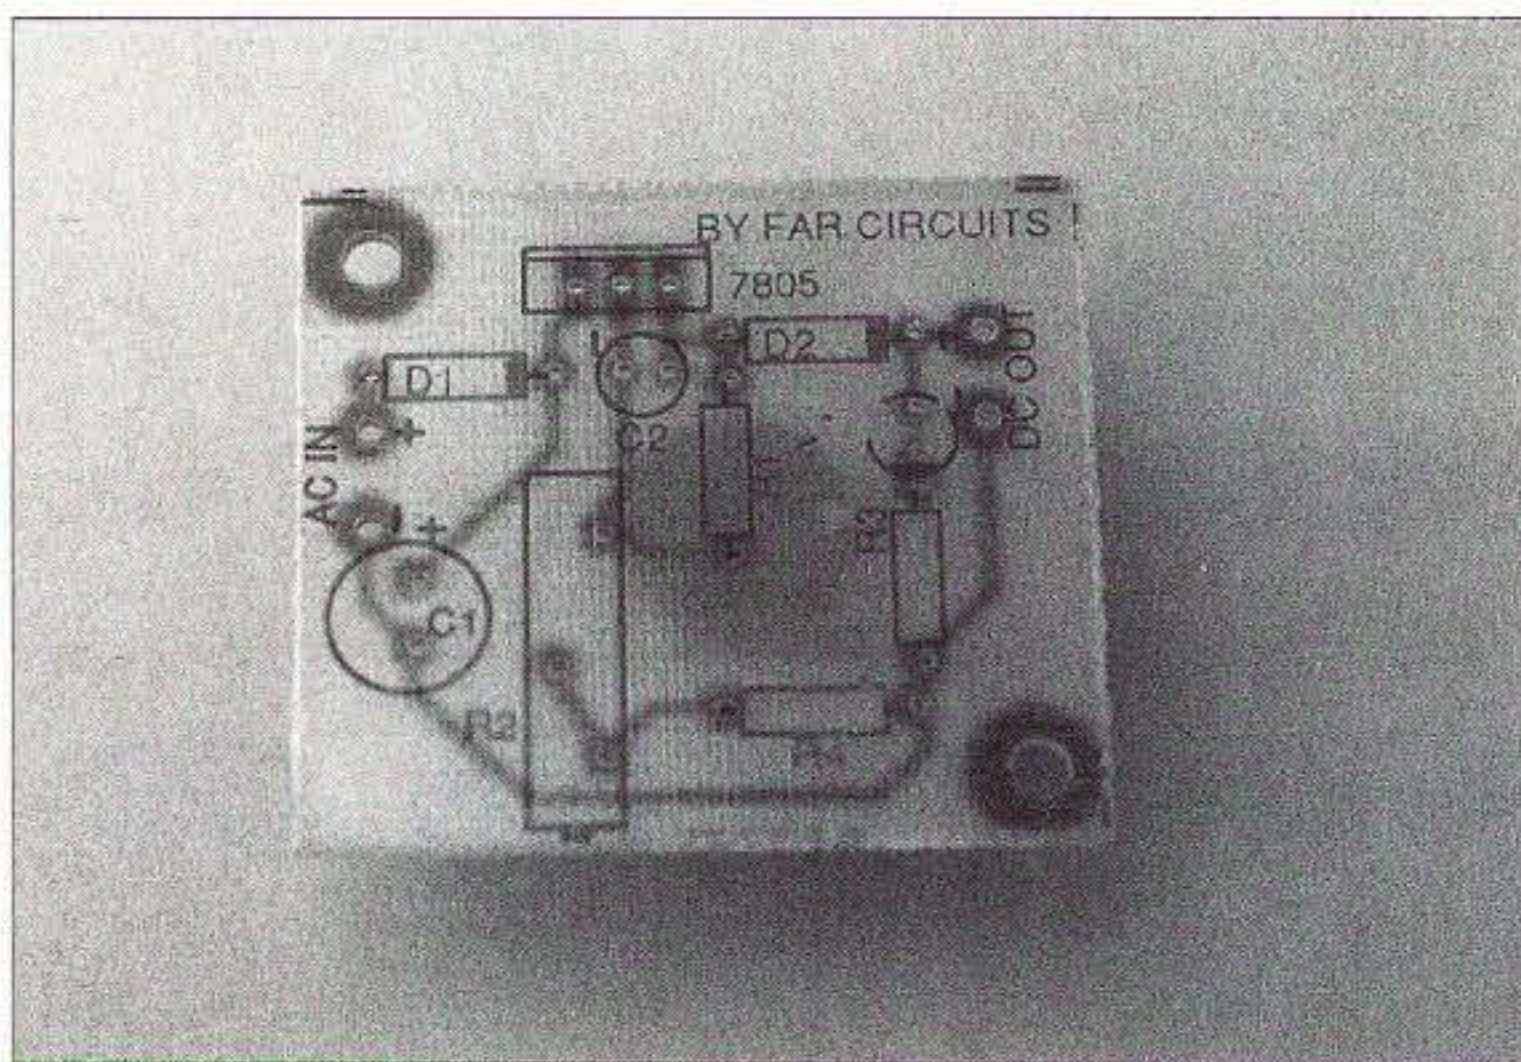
Photo B. FAR Circuits' PC board of the K9TRG multipurpose NiCd charger is pre-drilled and silk-screened, with a parts placement guide for easy and foolproof home assembly. Photo by K4TWJ.
